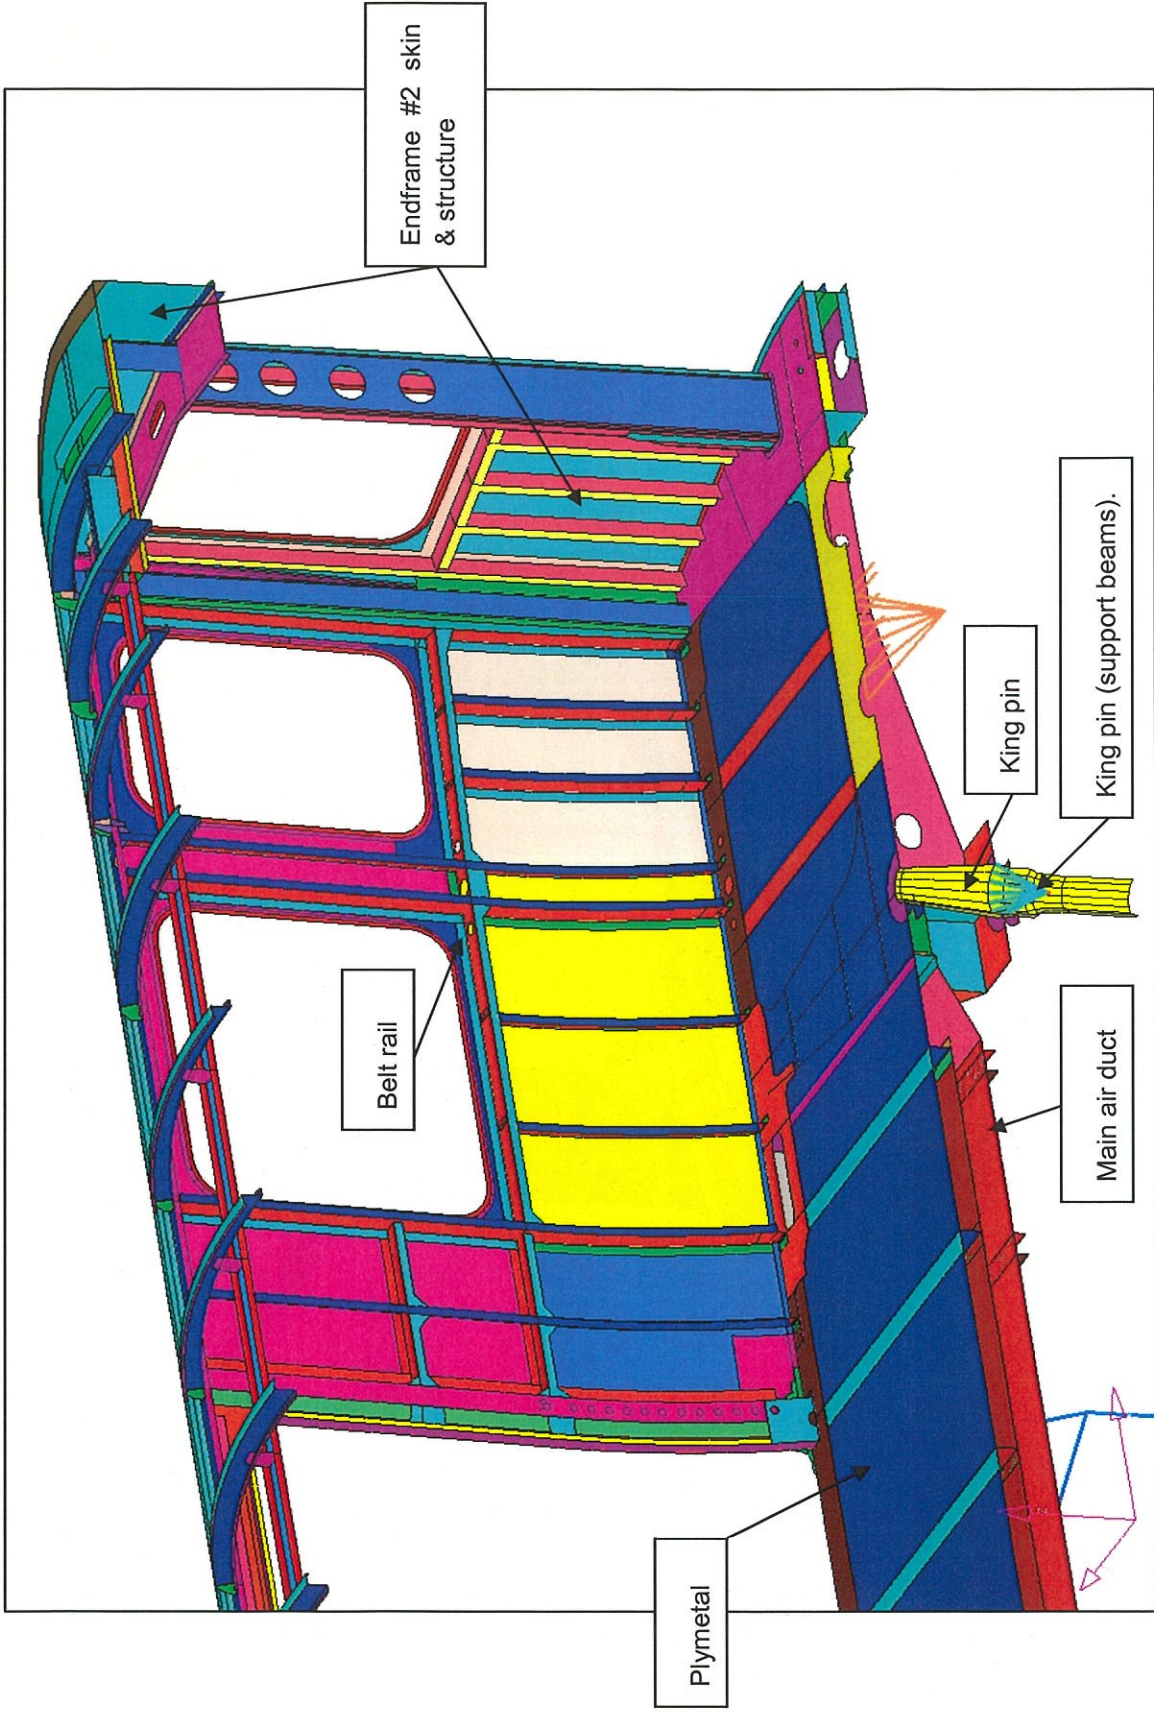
FEA of Endframe # 2 (roof corrugation is not shown).
